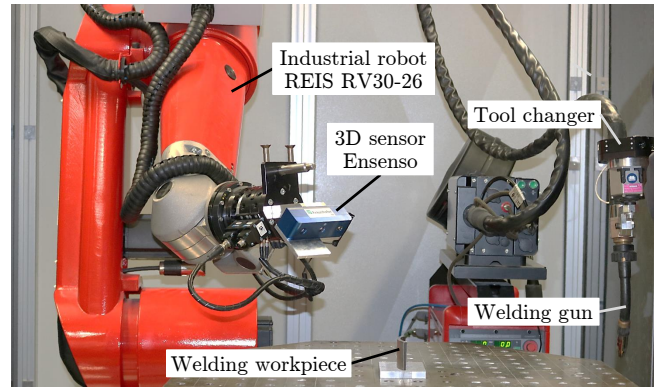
Setup of robotic welding system with 3D sensor to measure workpiece shape deformations
